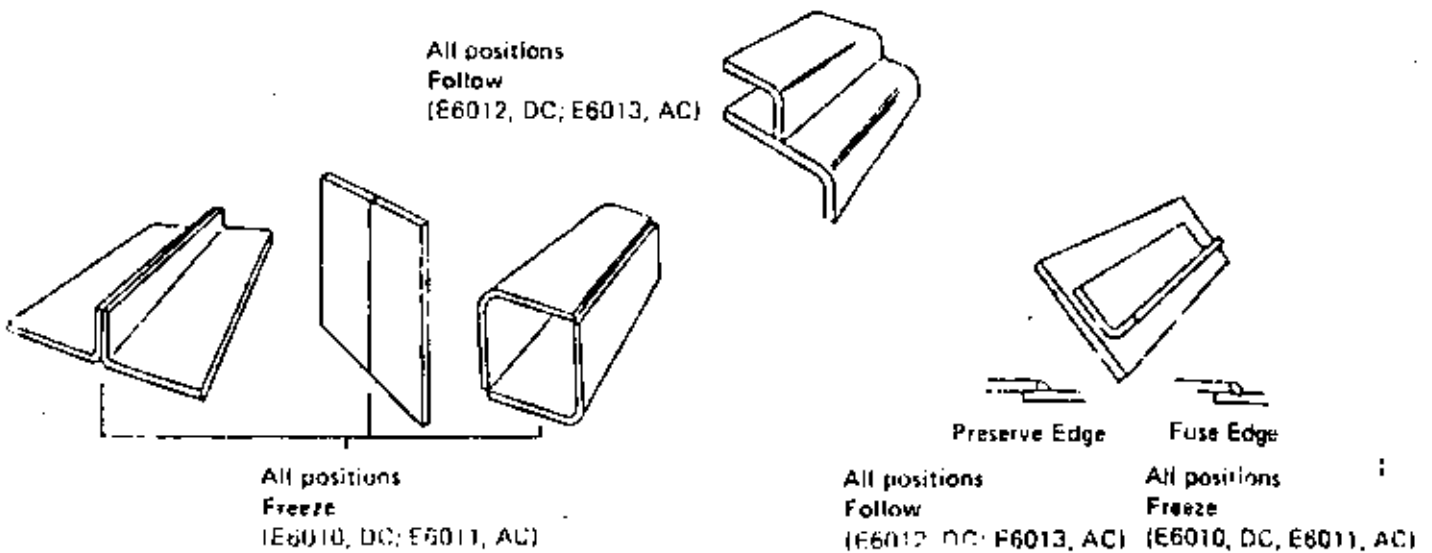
Guide to selection of electrodes for sheet-metal welds
